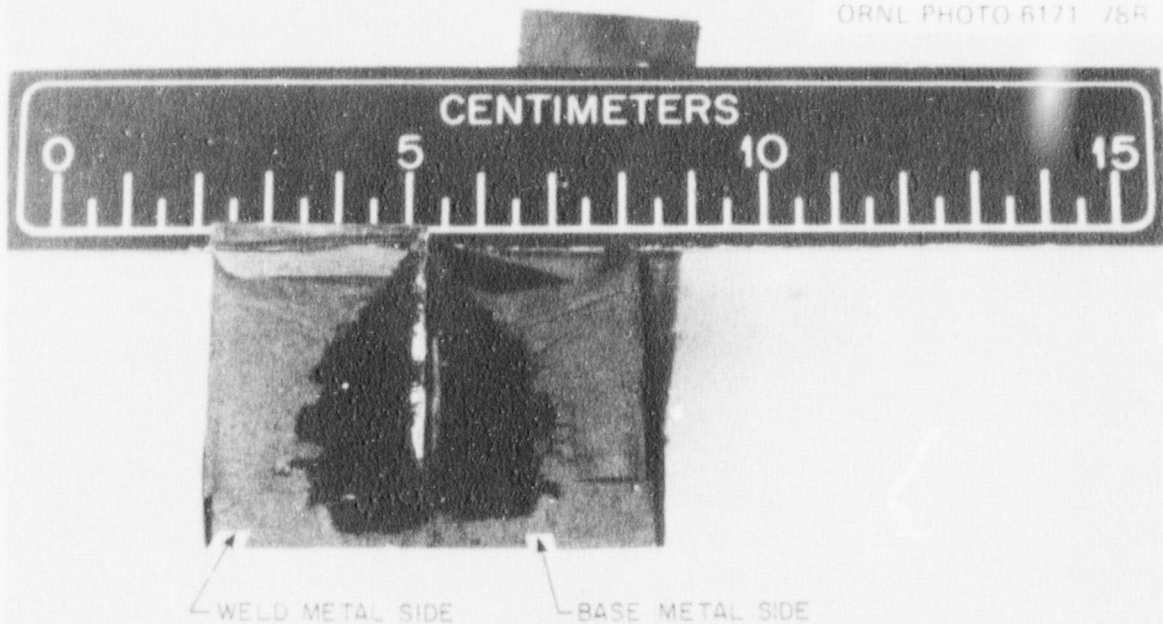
V-7B fracture surfaces in slab C exposed by splitting the chilled slab.
